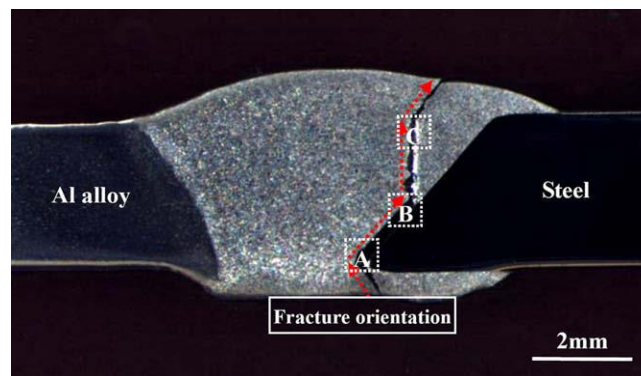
Macrofracture profile of the aluminum–steel joint.
